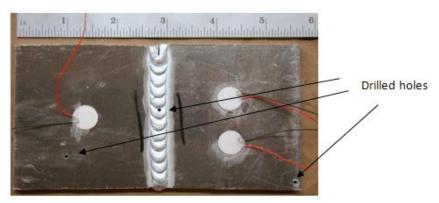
The welded plates prepared for the test. A  $\frac{1}{4}$  inch cut is seen at the top of the weld, along with three  $\frac{1}{16}$  inch diameter through holes.
